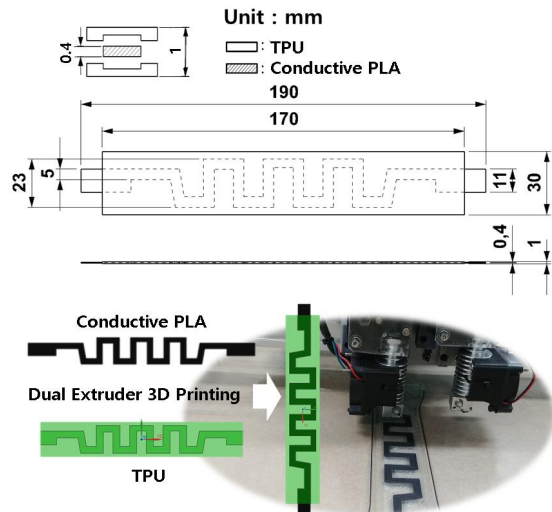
Fabrication of flexible sensor using dual 3D printer
